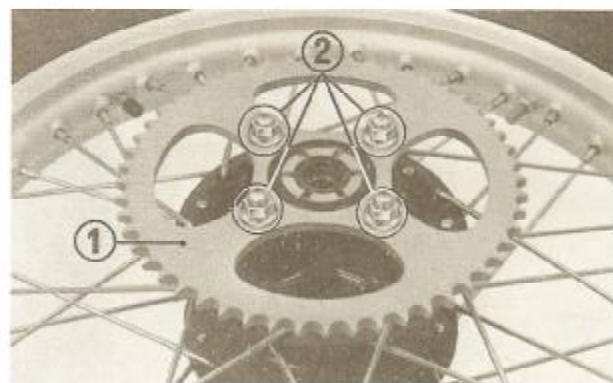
(1) Driven sprocket (2) Lock nuts
